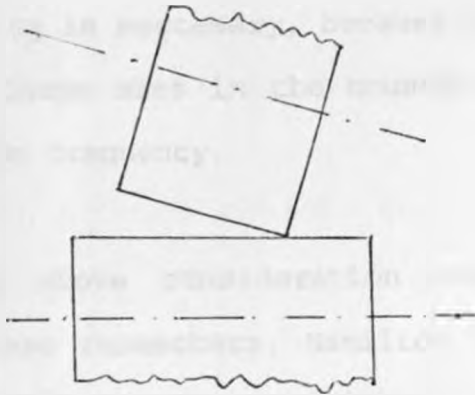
Edge contact between cylinders formed as a result of bearing misalignment.
